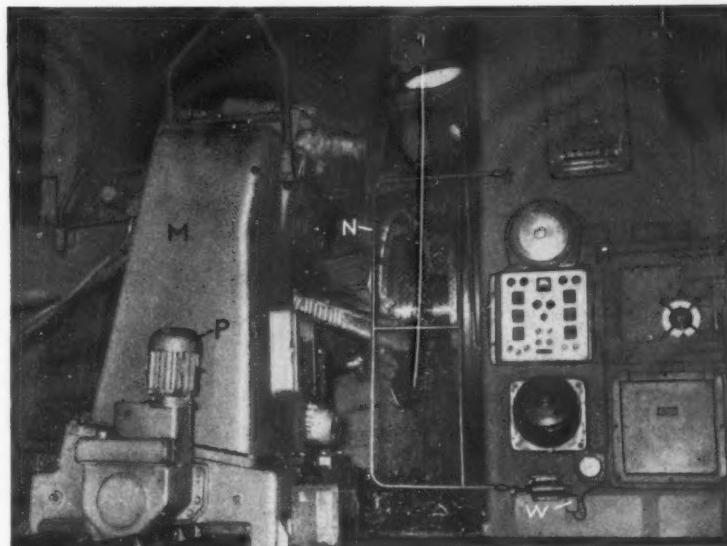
Close-up view of one of the clamp units on the Sverdlov machine, with a propeller blade in position. Each unit has two electro-mechanically operated clamping rams and a stop member which can be adjusted horizontally
